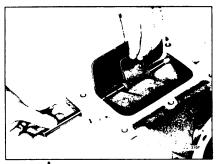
Installing Air Shut-Off Valve Spring and Valve
